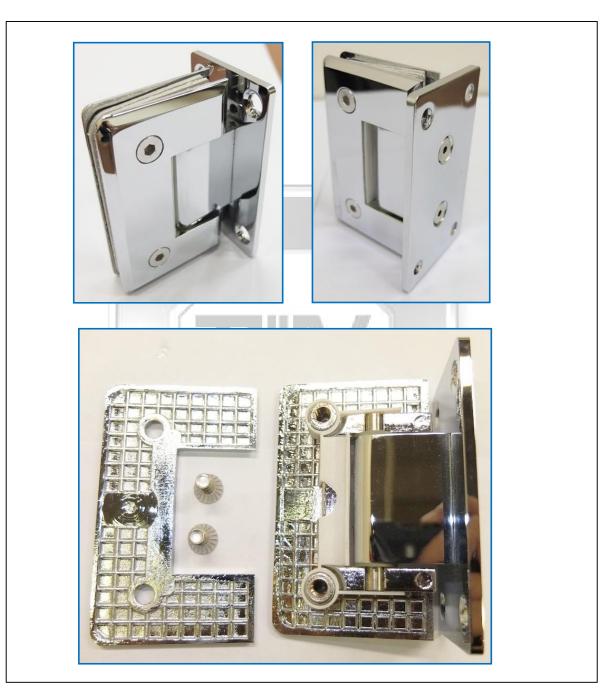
Shower hinge, model: CKS-301 (glass to wall, 90°) (photo taken before test)
